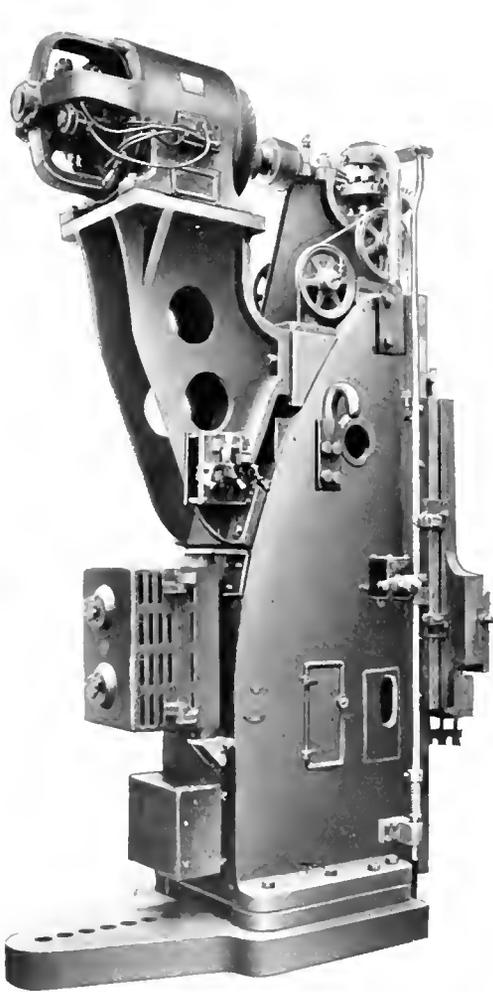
48 in. Slotter equipped with Reversing Motor Drive. Left hand side, panel cover closed
